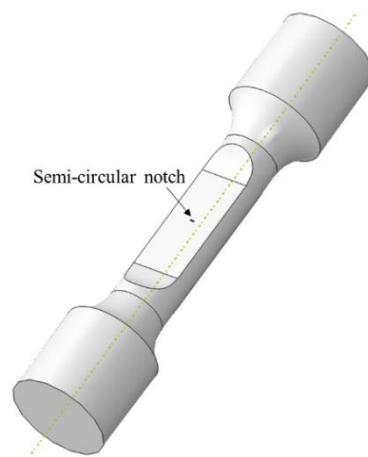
Round uniaxial fracture mechanics specimen geometry with 40.48 mm² cross-section testing area.
